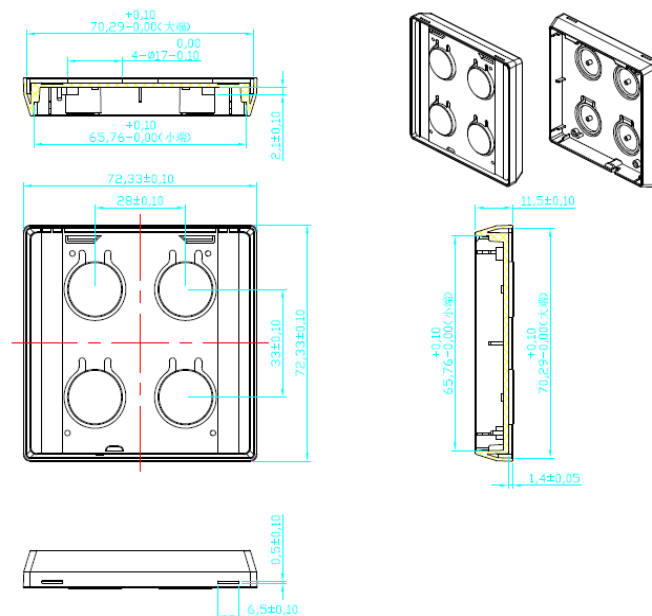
Outlook and dimension of PICO-2 (Unit: mm)
